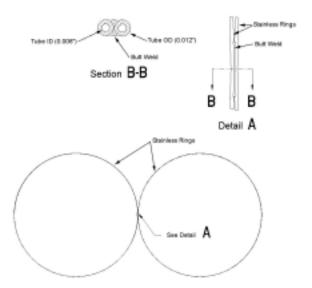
Solar Sail: Typical Pair of Butt-welded Adjacent Rings
